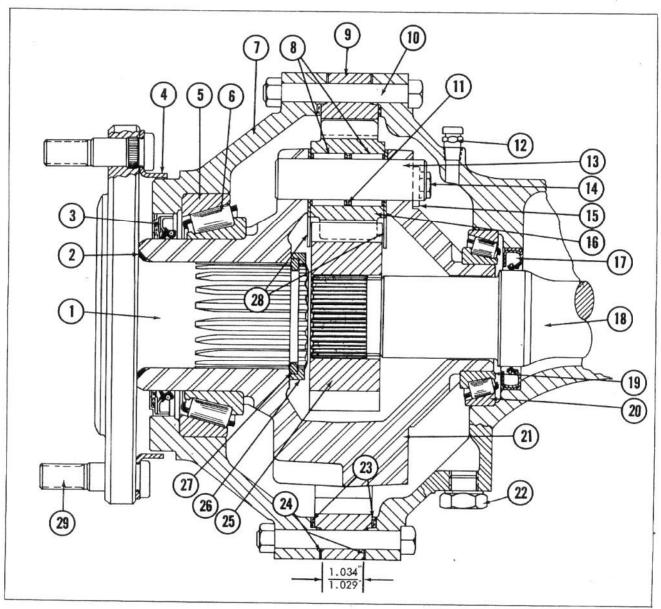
Axle Planetary Assembly - Narrow Ring Gear
